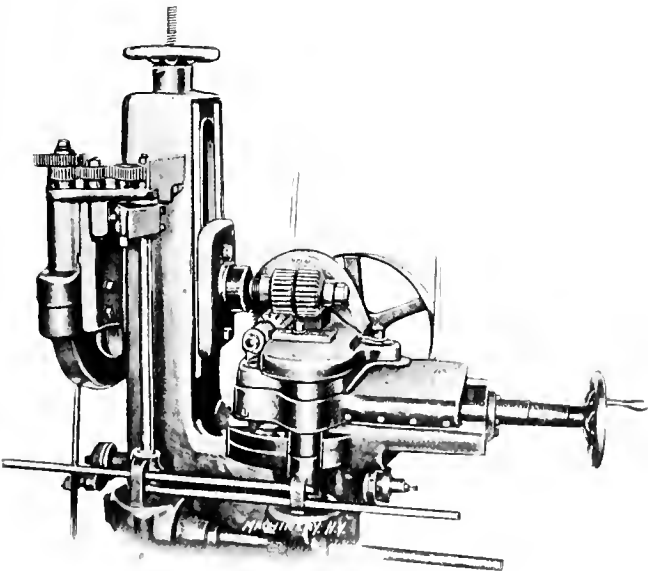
Juengst Gear-hobbing Machine, uses a Novel Principle of Helical Milling
